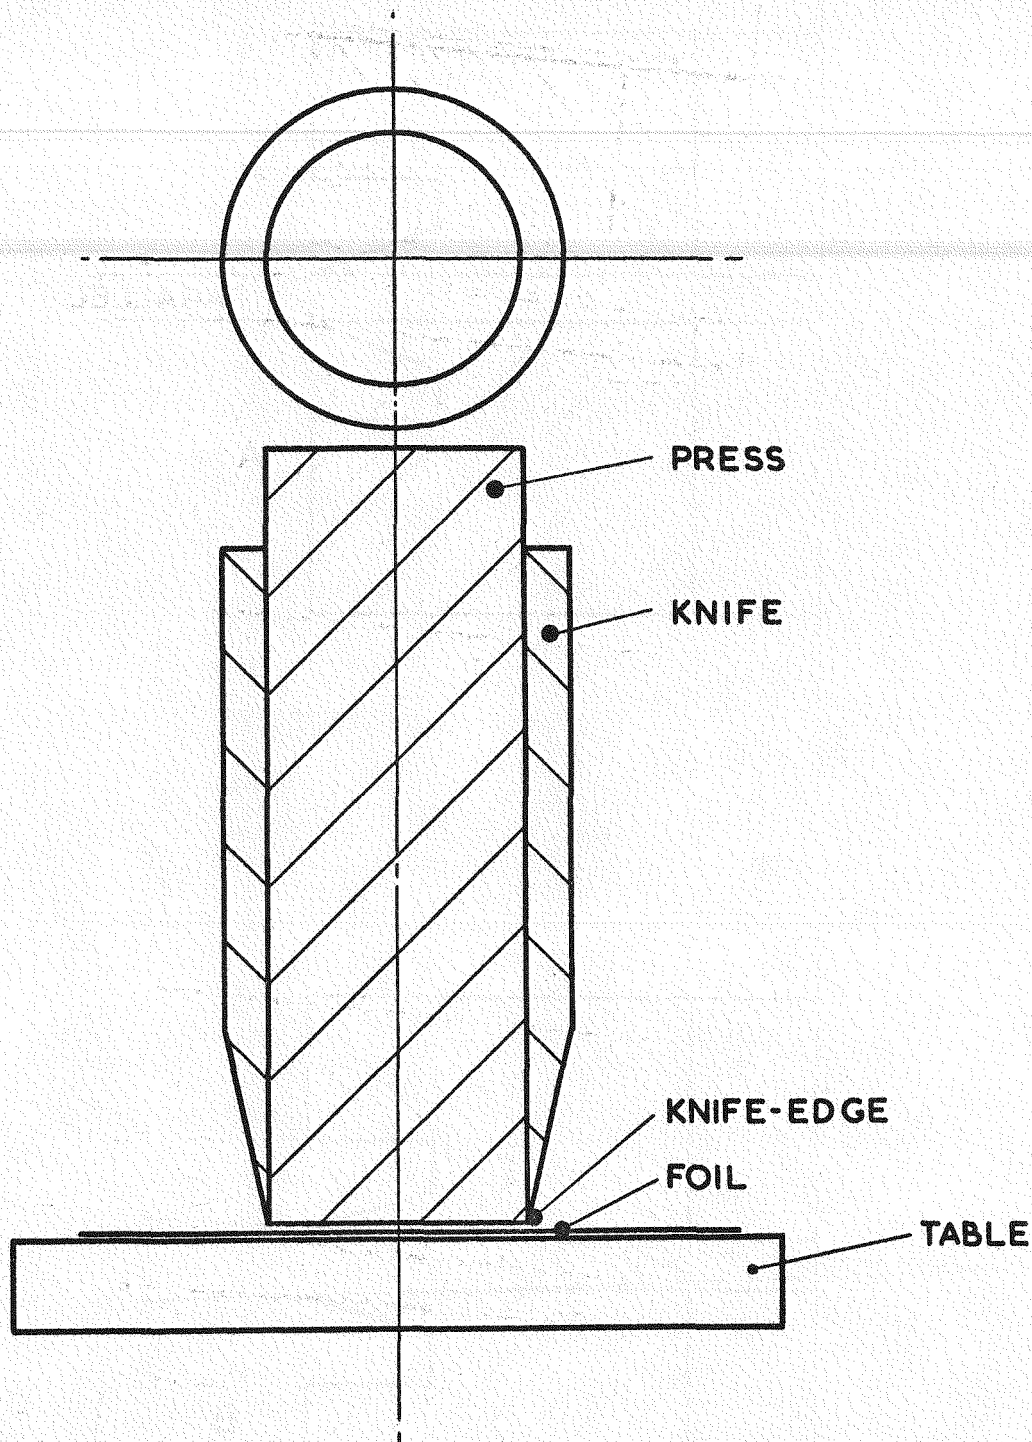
TOOL FOR CUTTING THIN DISCS.
